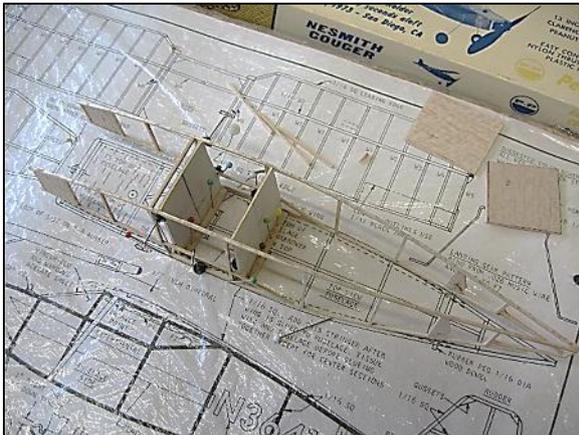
Fuselage sides pinned upside down to board and temporary formers, with first three horizontal spacers glued in place
